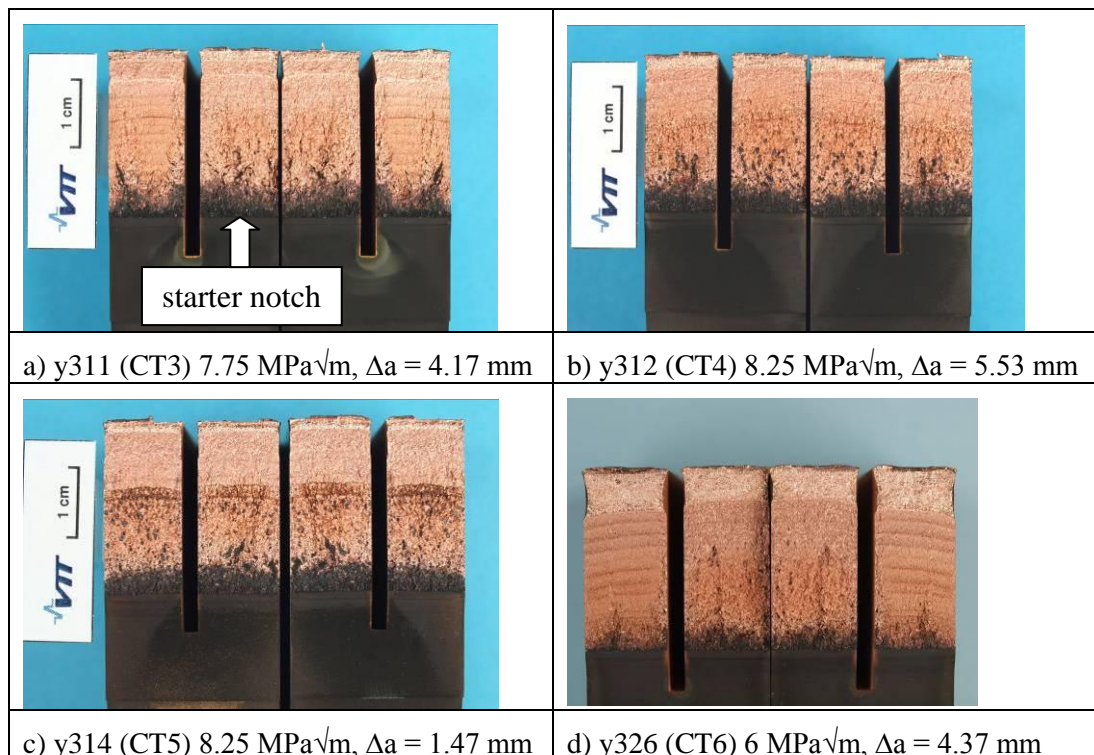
The oxidised fracture surfaces of Cu-OFHC CT specimens after testing at 175°C.
